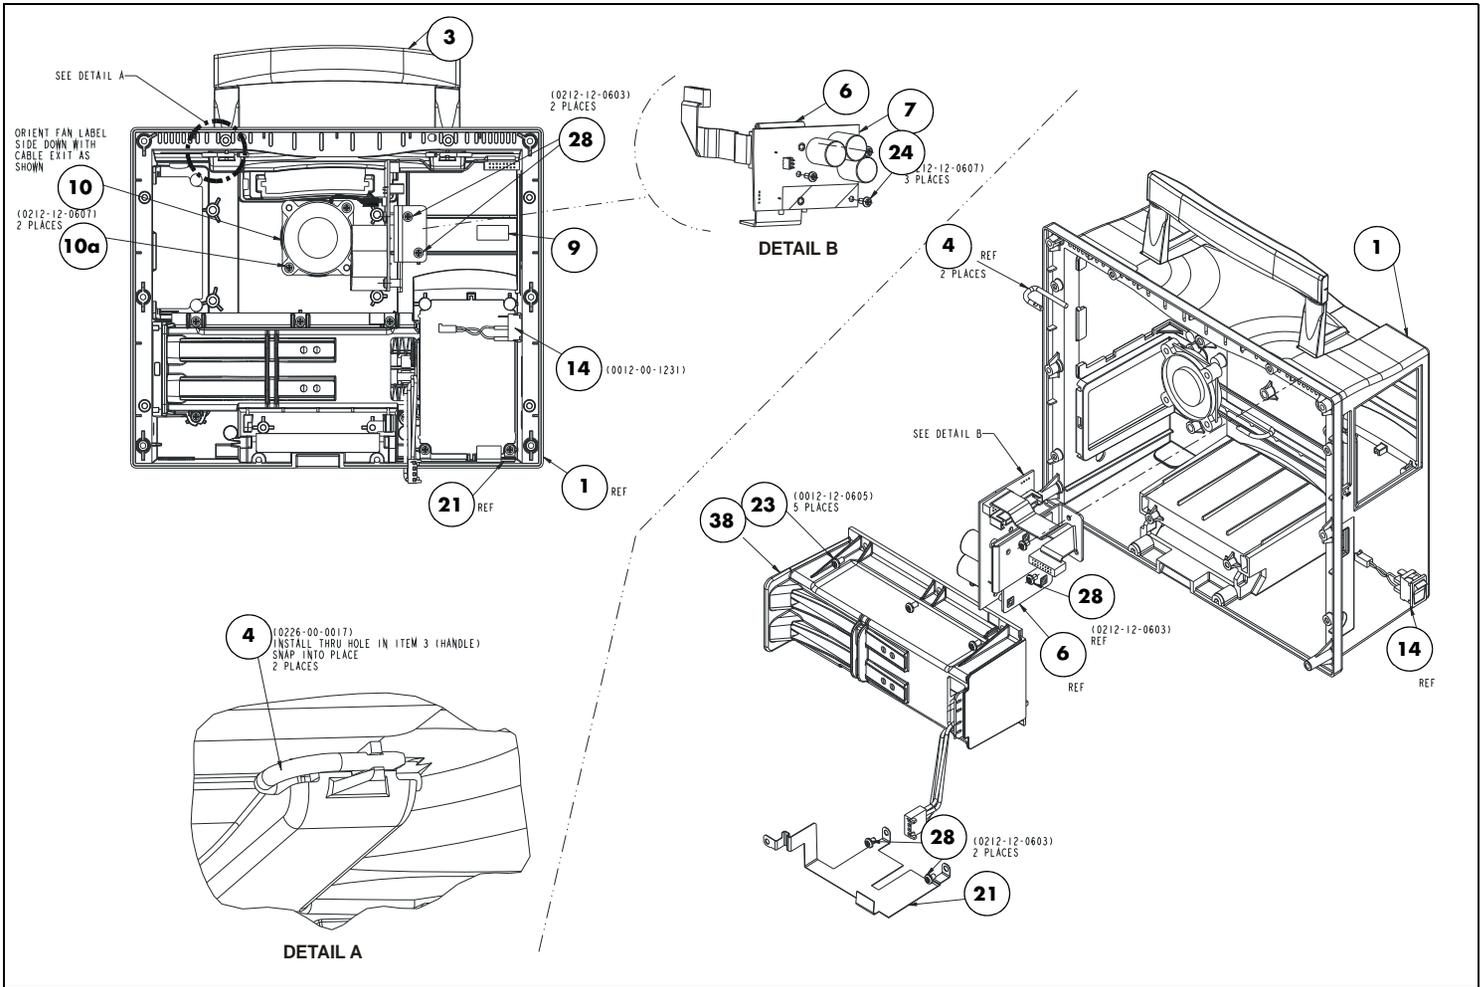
Rear Housing Assembly (Sealed Lead Acid battery configuration)
